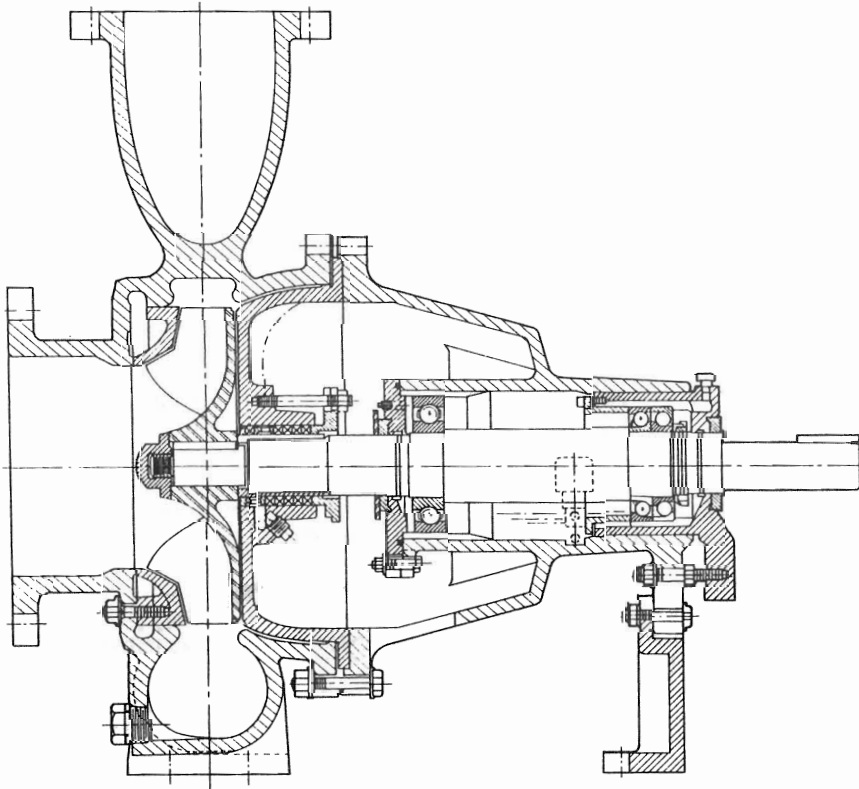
Sectional drawing of paper-stock pump in Fig. 15-1 shows nonclog impeller (Worthington Corp.)
